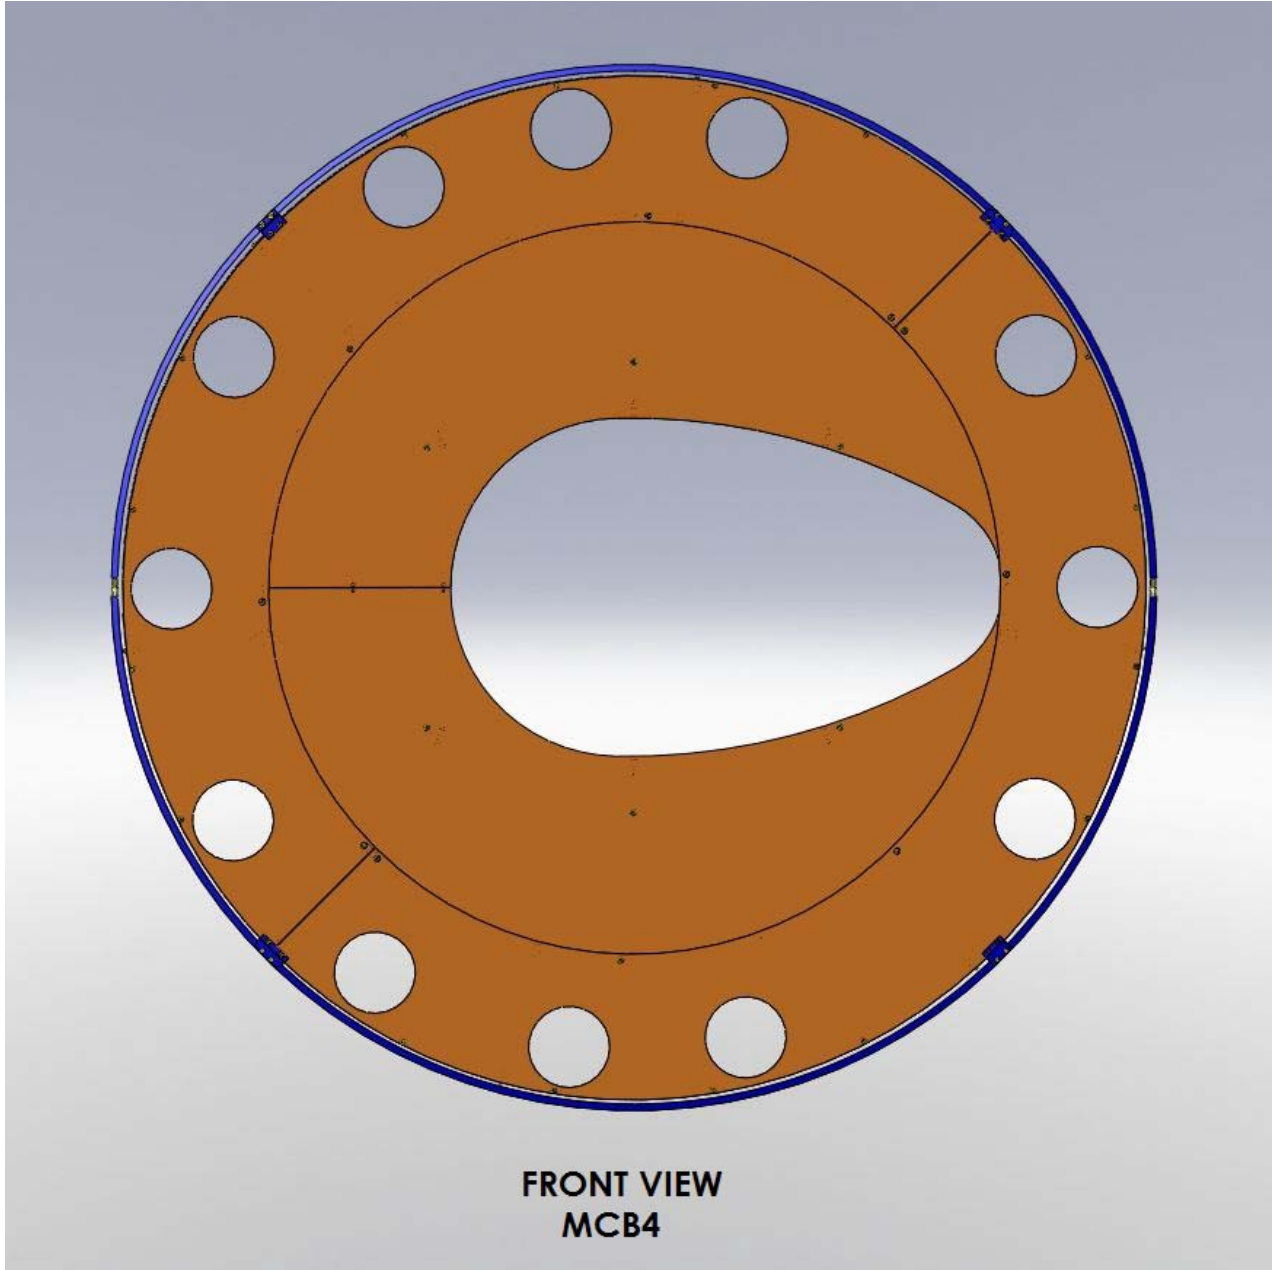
Front View of MCB4 Mode Cleaner Tube Baffle
